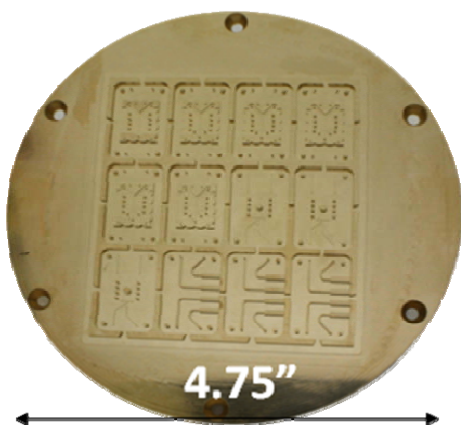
Micro-machined brass mold inserts containing 12 different chip designs.
